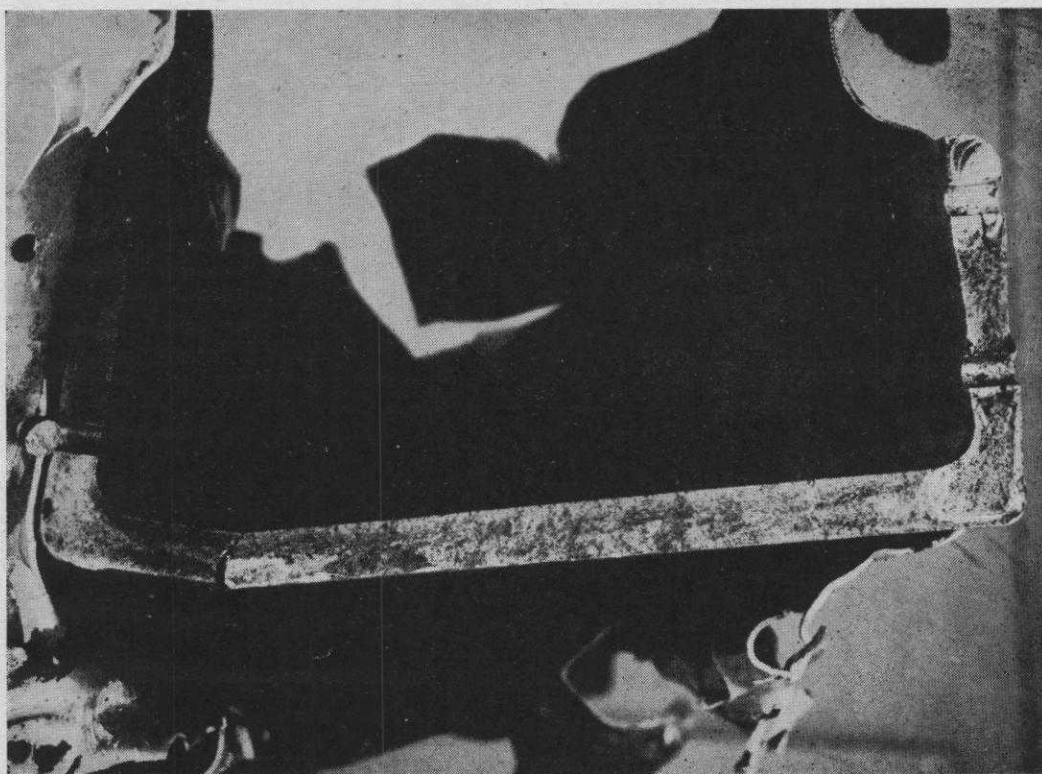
Fracture in aluminium alloy channel section, showing fatigue cracking in right hand rib.
